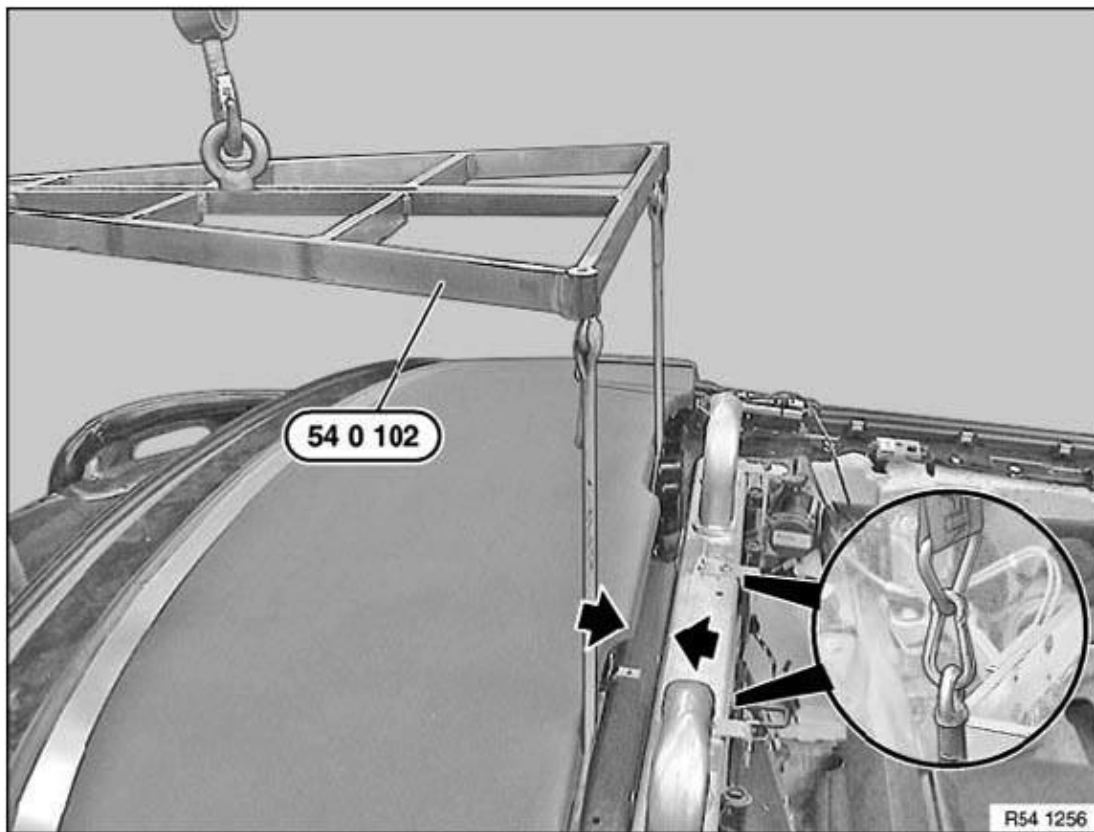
Positioning Special Tool 54 0 102 With Workshop Crane Over Roof Module
